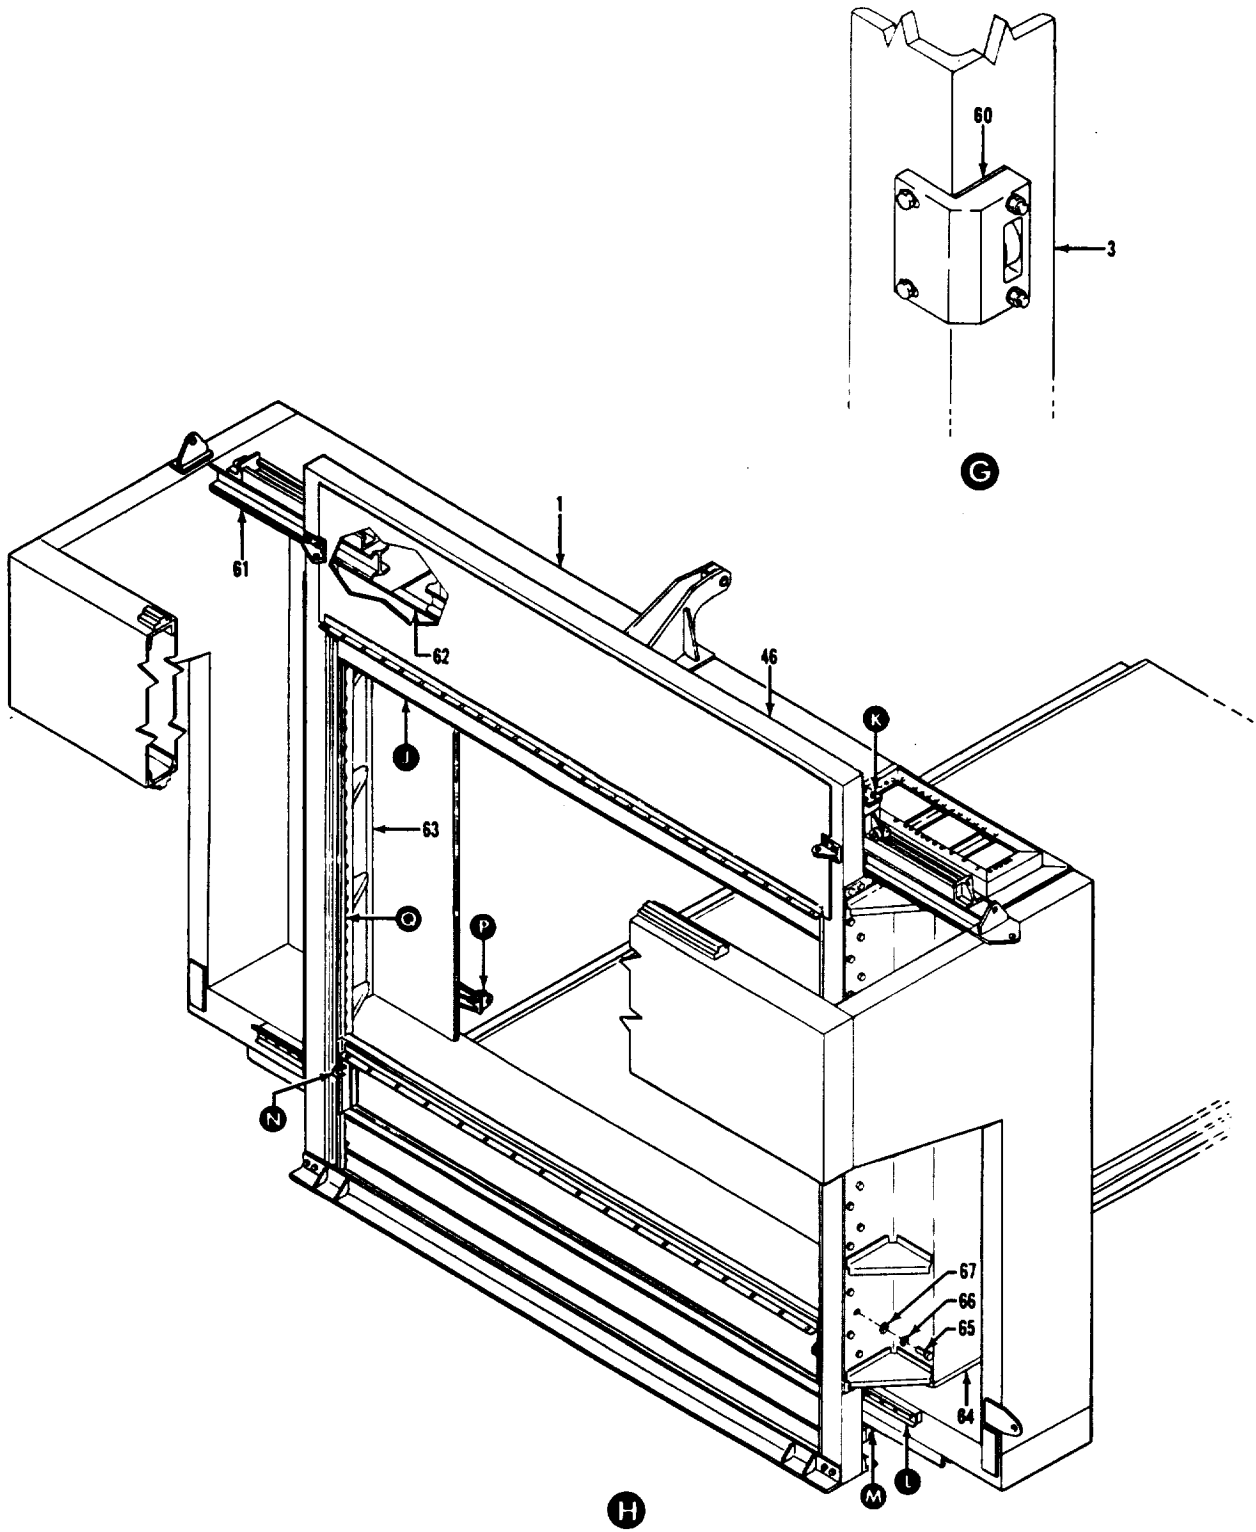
Extension Platform Assembly (Sheet 6 of 13)
